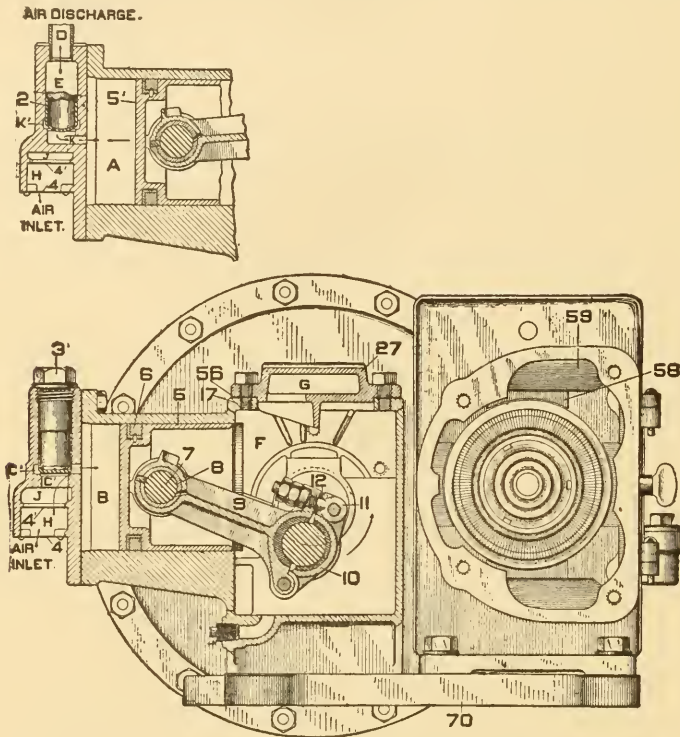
Part Section of Westinghouse Type "D-EG" Motor-Driven Air Compressor
